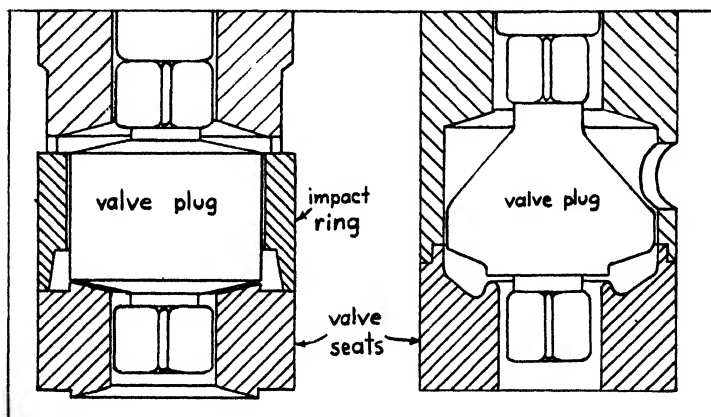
Cross-sectional views of the Cherry-Burrell 125 viscolizer valve assembly (left) and the modified valve assembly (right) used in the investigation.
